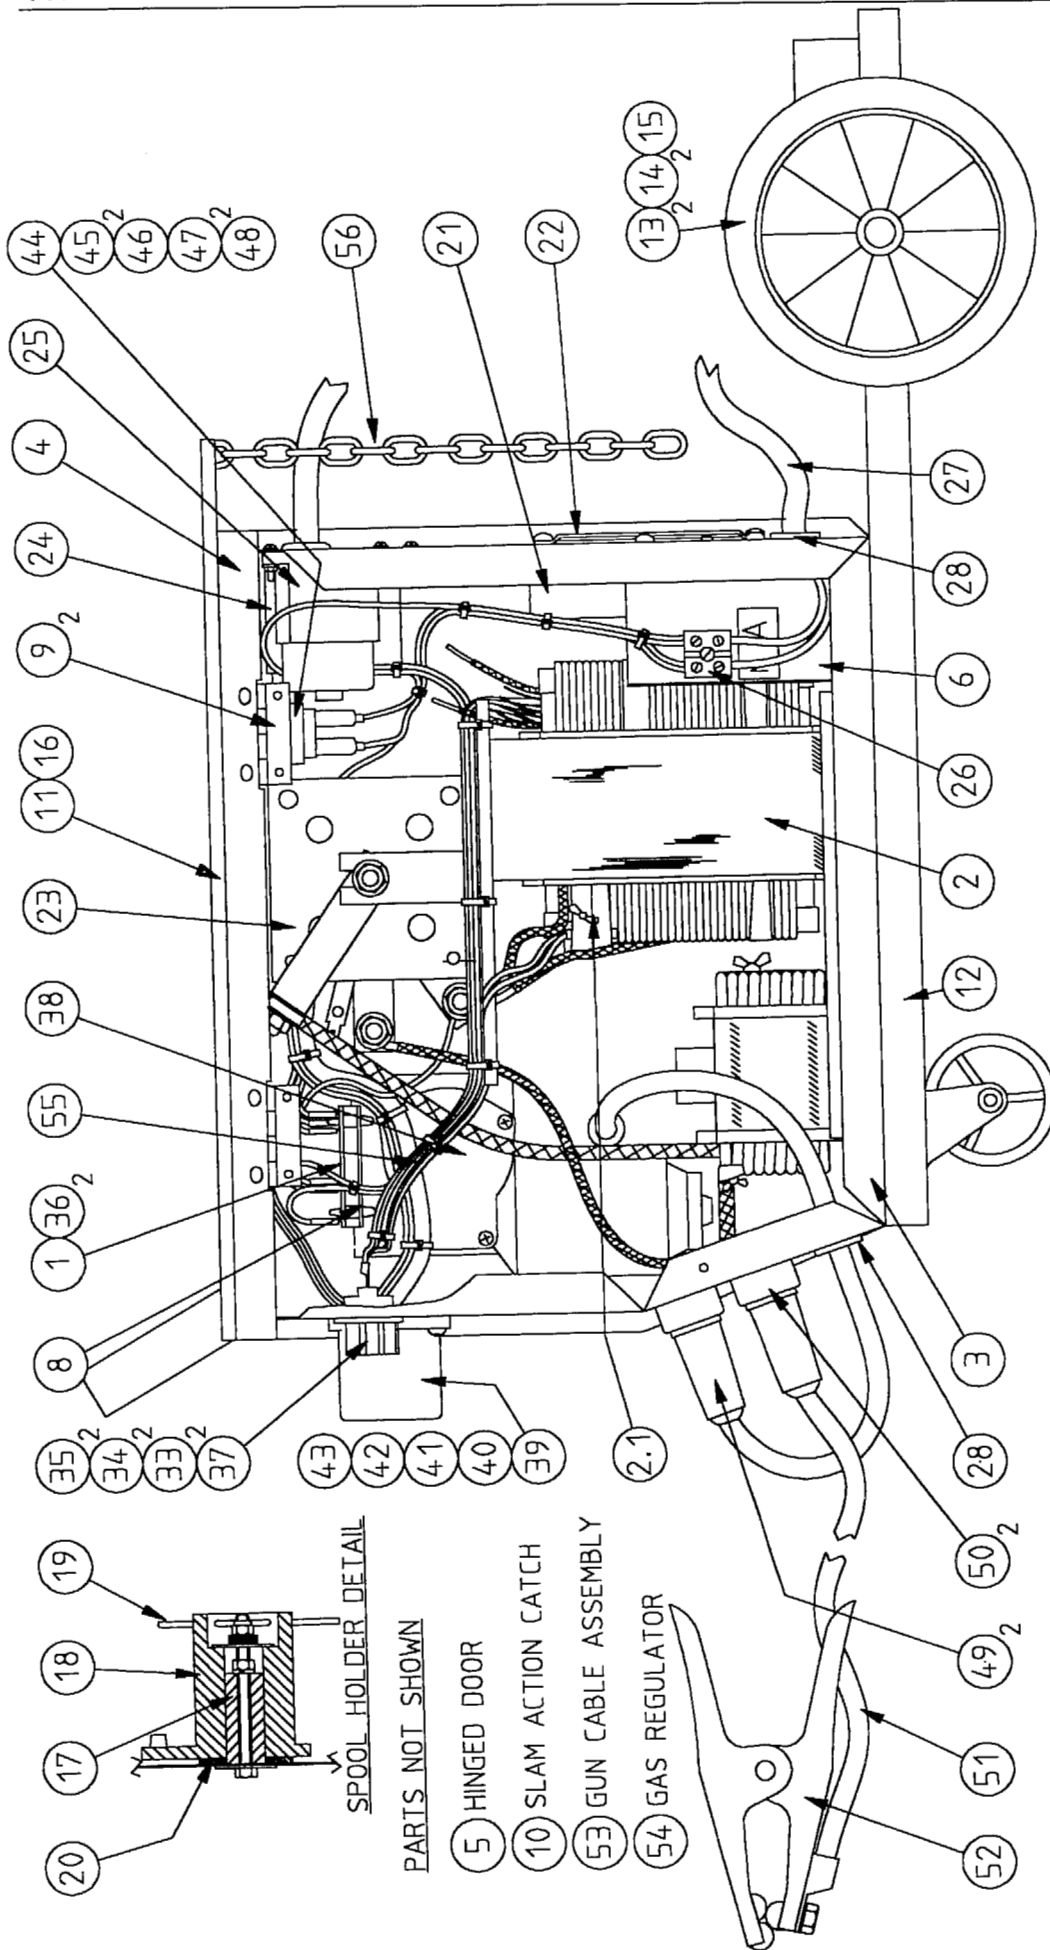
WELDMATIC 175S POWER SOURCE ASSEMBLY
